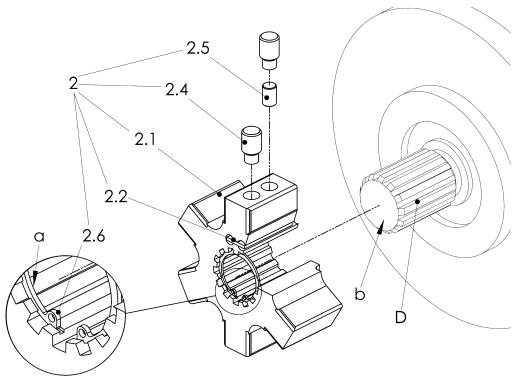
Mounting the hub spider (2) with CENTALOC clamping set
